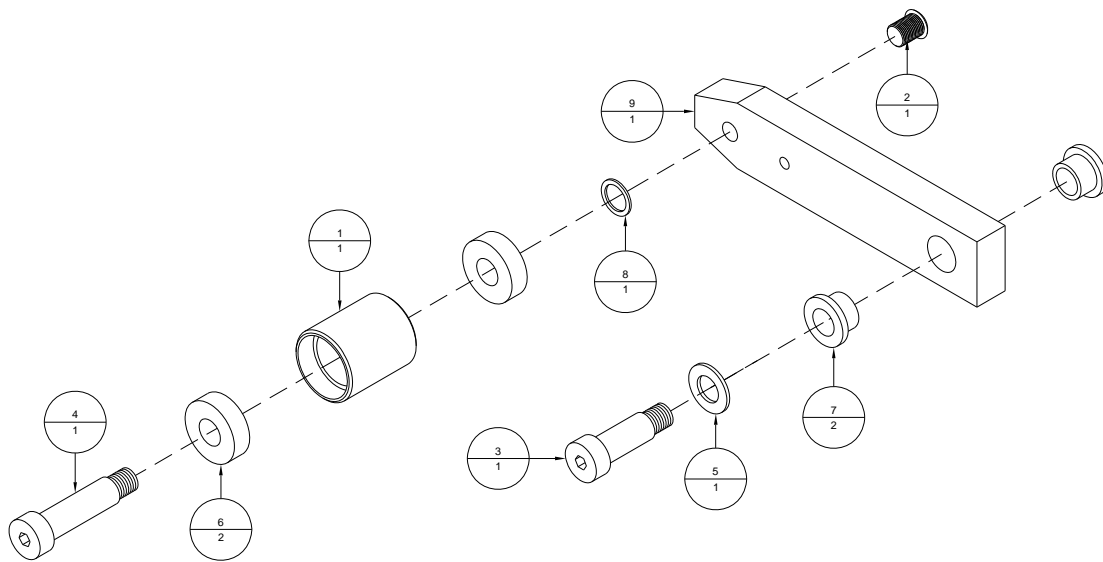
9104601A – Inline Motor Tensioner Assembly
